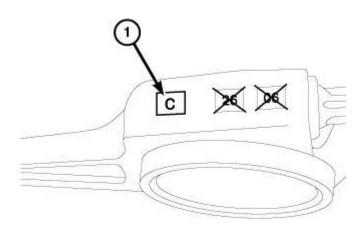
Connecting Rod Size Courtesy of CHRYSLER LLC
